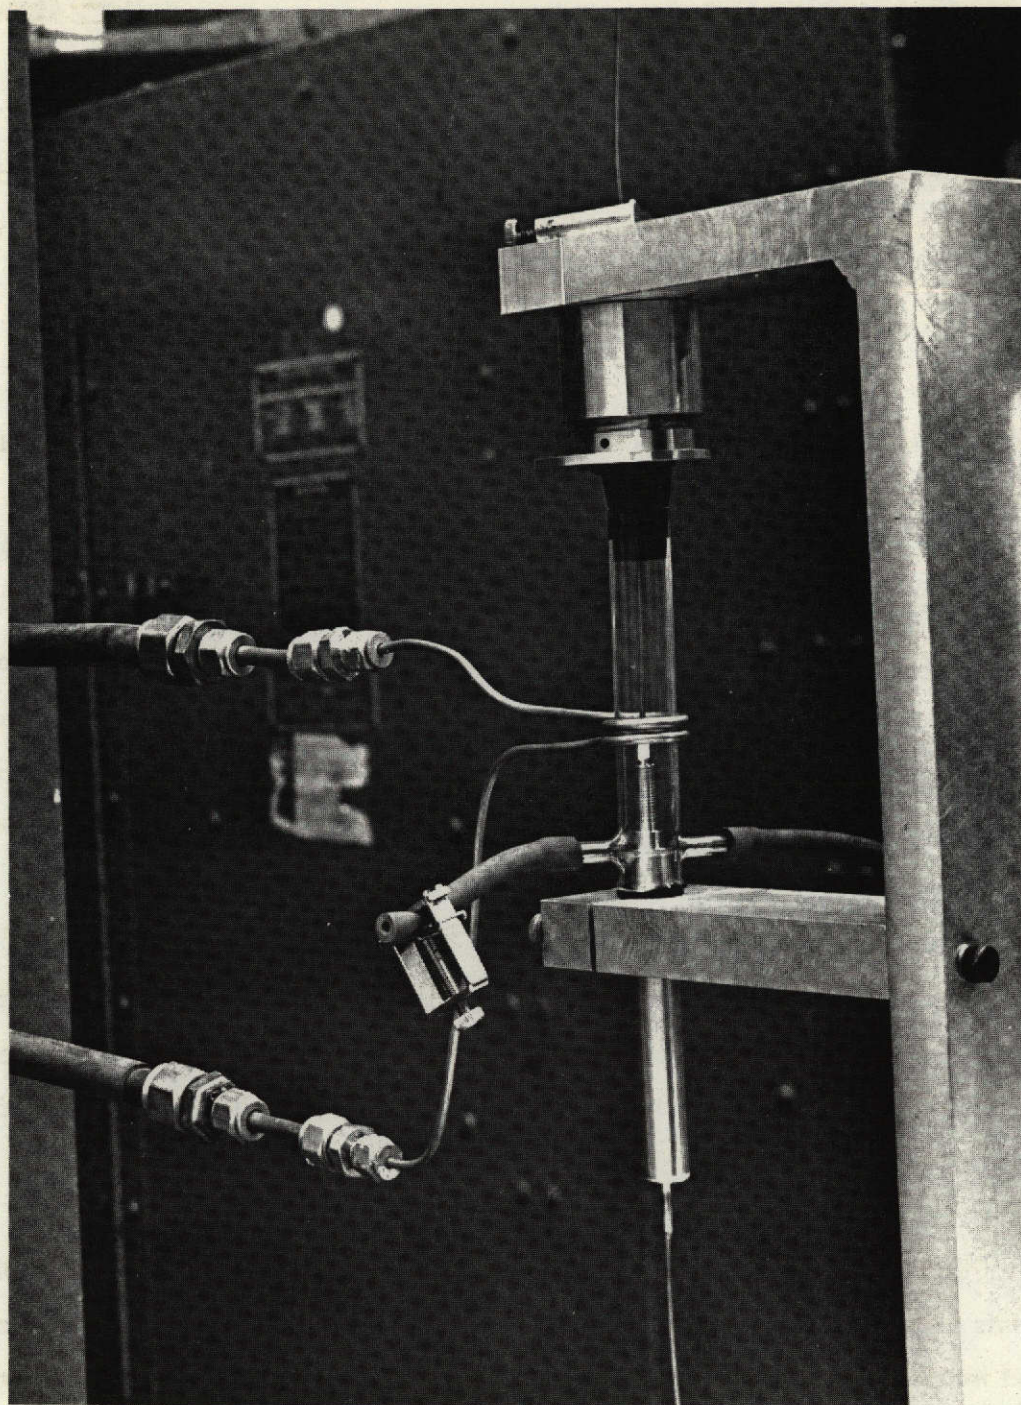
Vacuum/Inert Gas Purged Induction Heated Fixture for Brazing Thermocouples into Capsules.
